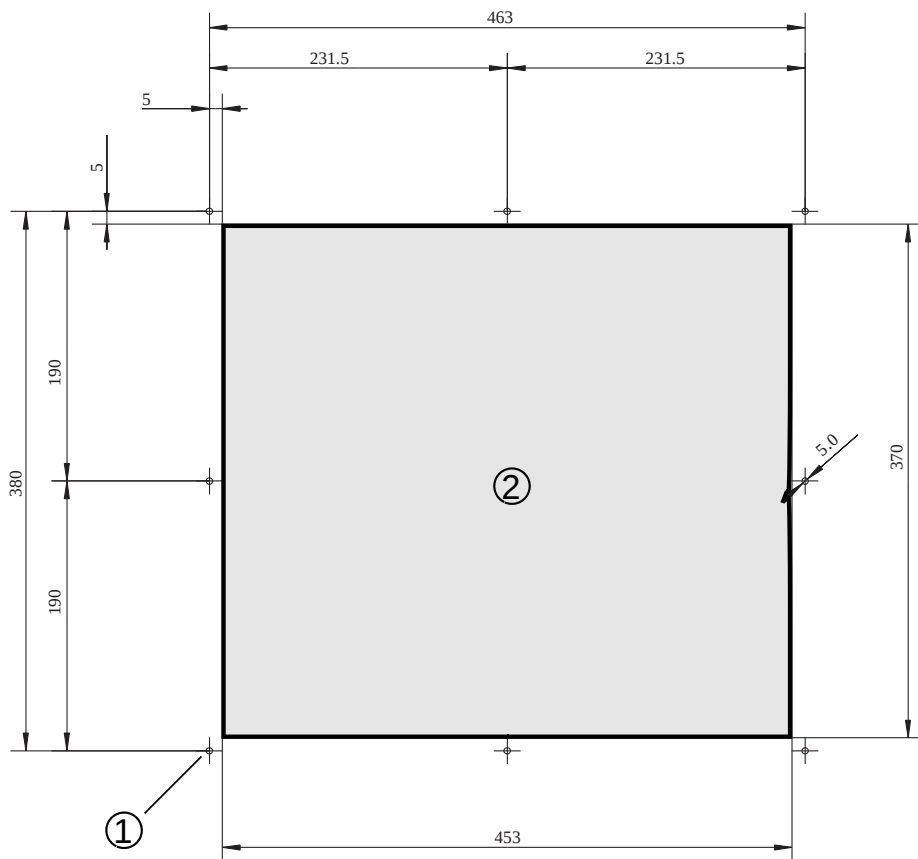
Mounting dimensions of the VDP 16.3 devices (in millimetres)
